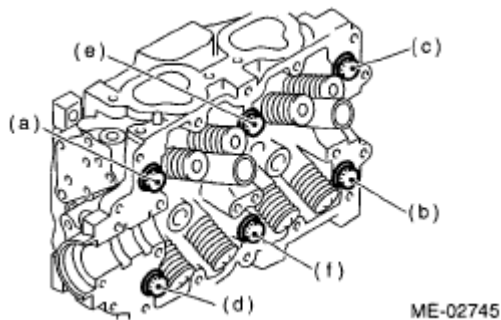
Removing Sequence Of Cylinder Head Bolts
